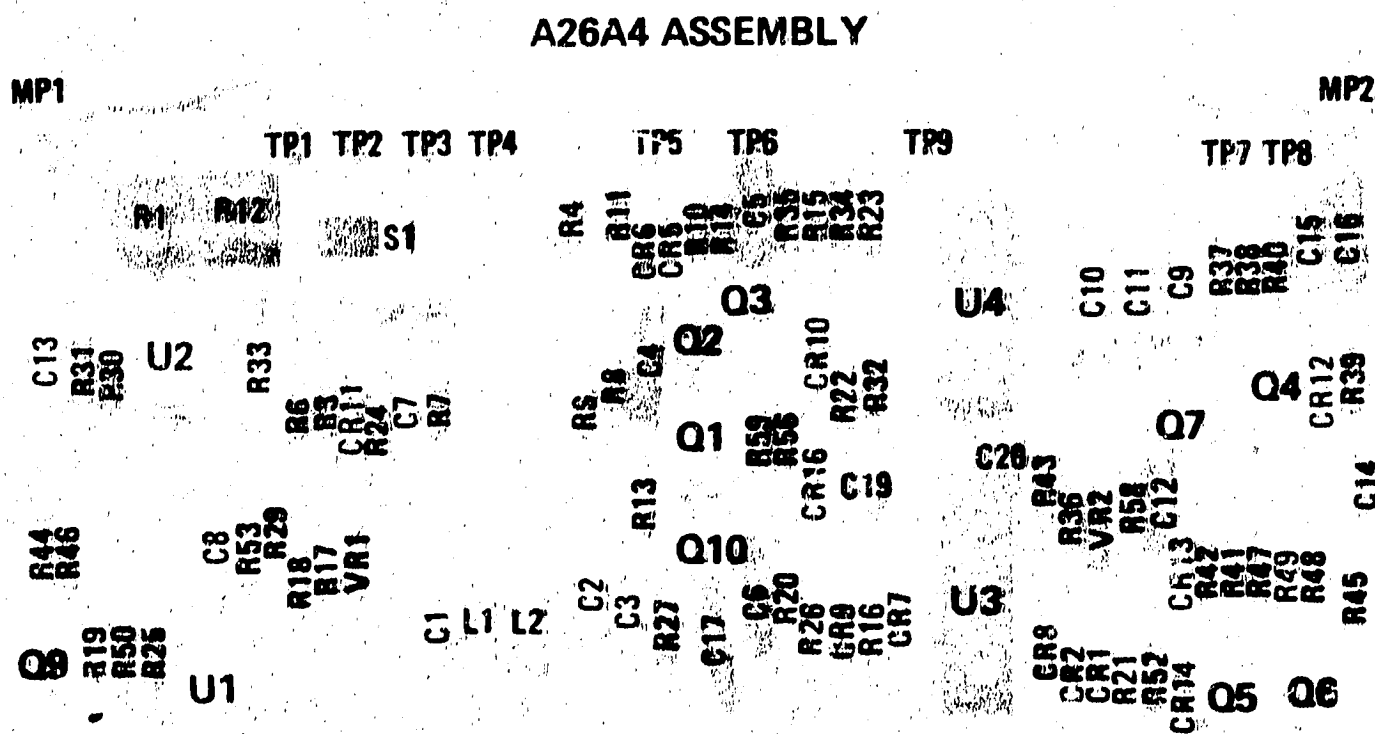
A26A4 AGC Amplifier Assembly Component Locations (P/O Change 2)
